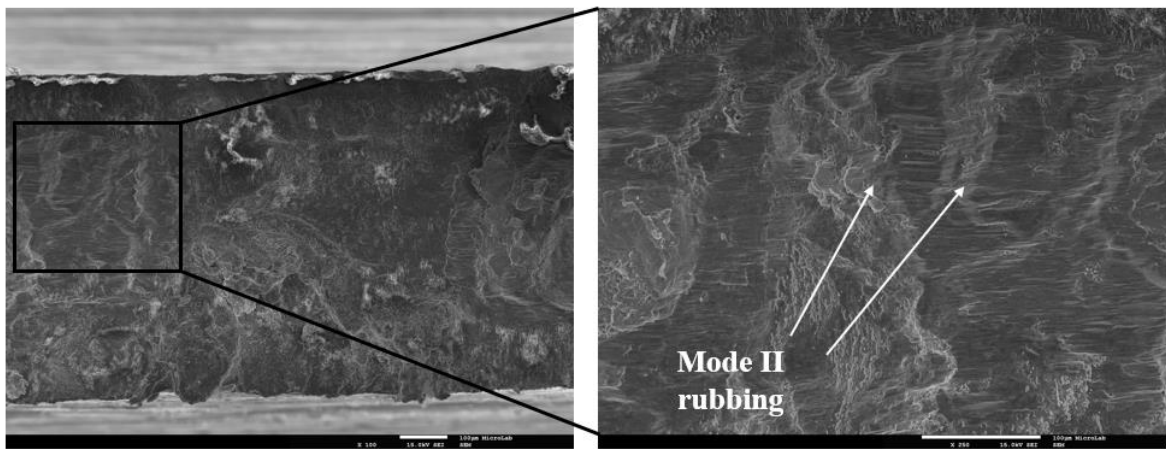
C-T2 fatigue crack surface and mode II shear rubbing marks.
